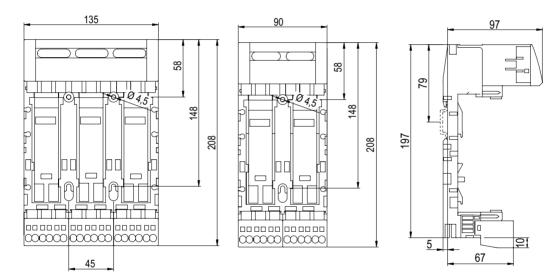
Dimension drawing of extension blocks featuring outgoing terminals with spring-loaded connection technology
